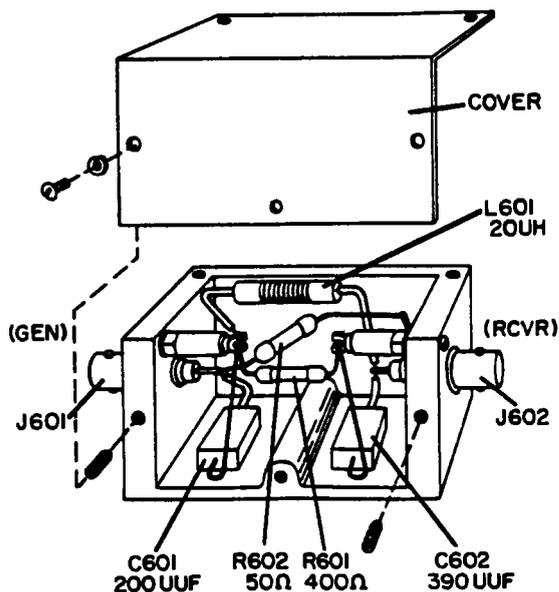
Adapter, Test MX-1652/TRM-1 (Antenna Simulator), Exploded View
